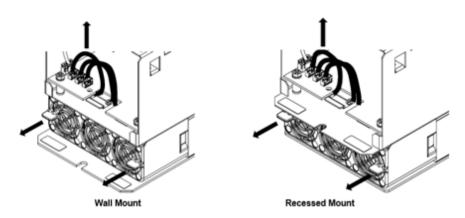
Disconnect and remove the fan plug(s) from the Drive PCBA
